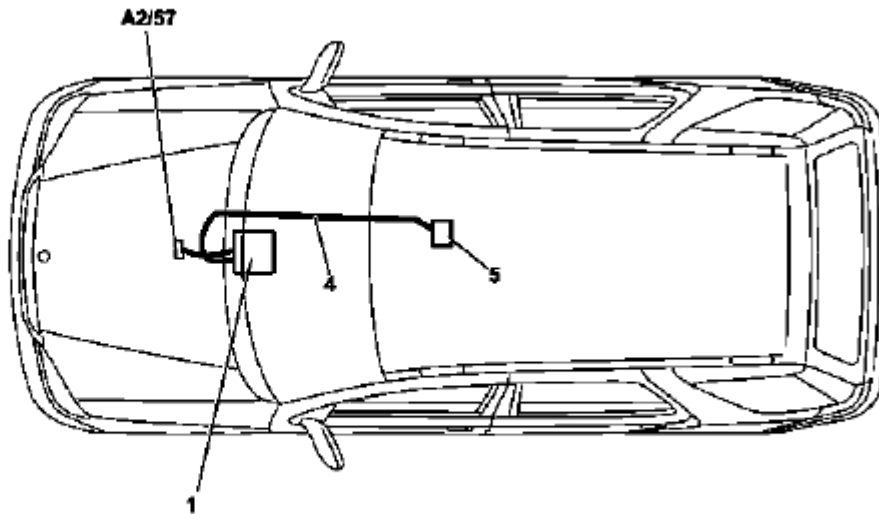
Identifying Radio Connector And Adapter Wiring Harness
